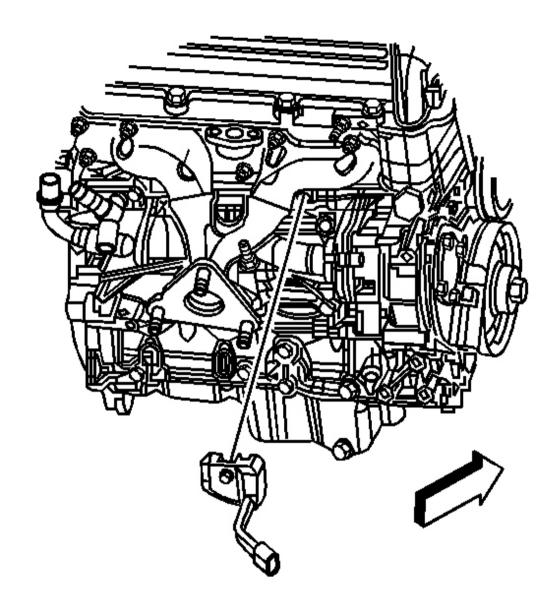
View Of Coolant Heater Courtesy of GENERAL MOTORS CORP.
